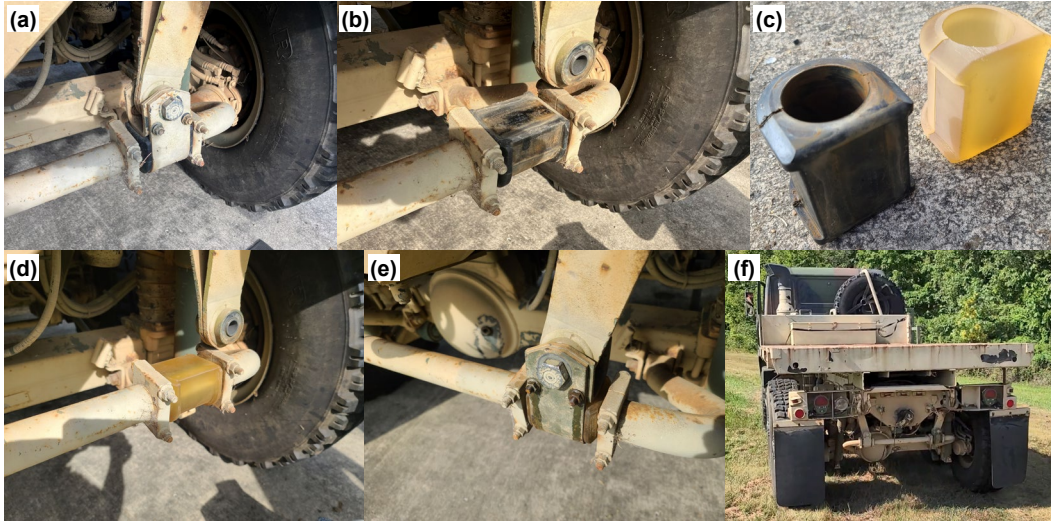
Resilient mount test fit on vehicle: (a) rear torsion stabilizer sway bar, (b) partial disassembly with black OEM resilient mount visible, (c) comparison between OEM part and molded part, (d) partially installed molded resilient mount, (e) fully installed resilient mount, and (f) FMTV driving with molded resilient mount installed.
